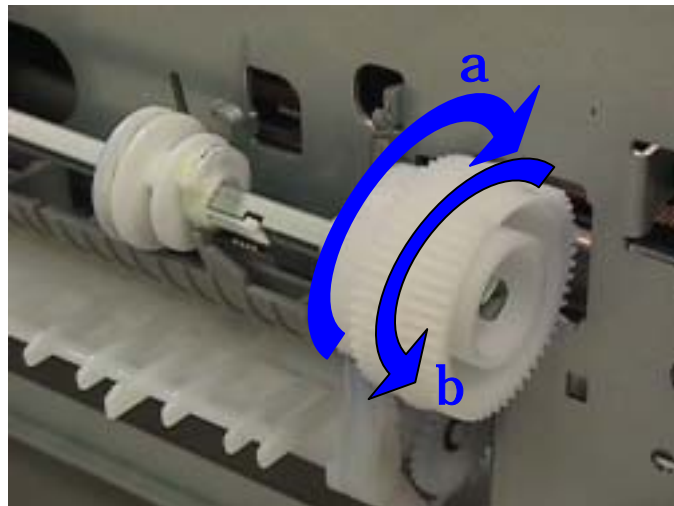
Positioning in LIFT CAM SHAFT ASS'Y adjustment 2
